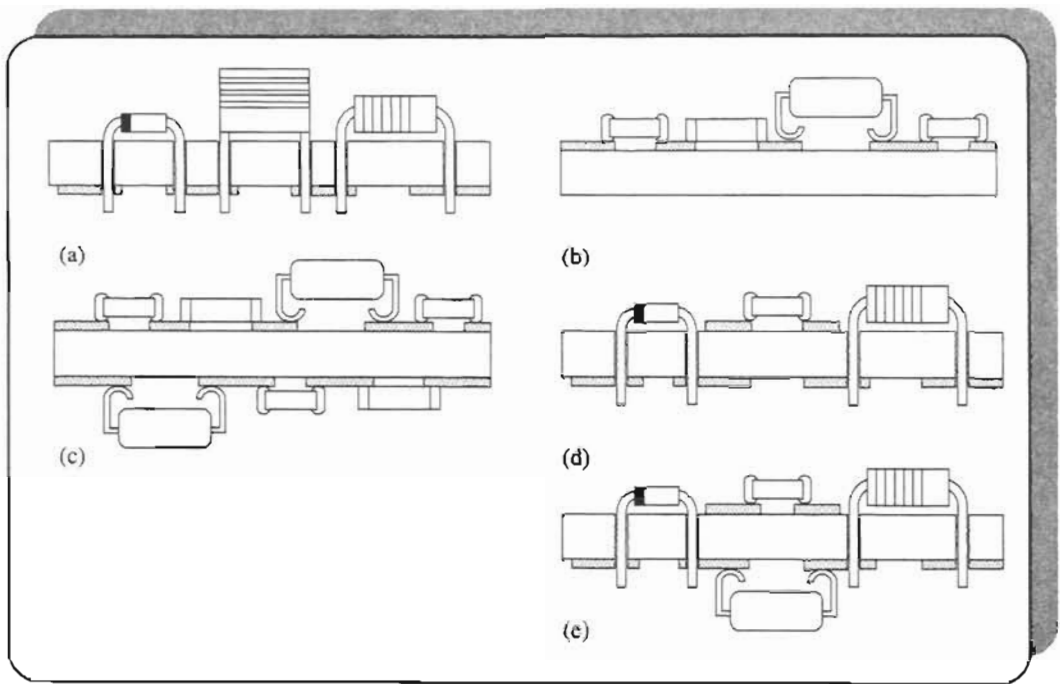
Five variants of electronics assemblies, shown in cross-section (a) through-hole components on one side (b) surface mounted components on one side (c) surface mounted components on both sides (d) through-hole and surface mounted components on one side (e) through-hole and surface mounted components on both sides
